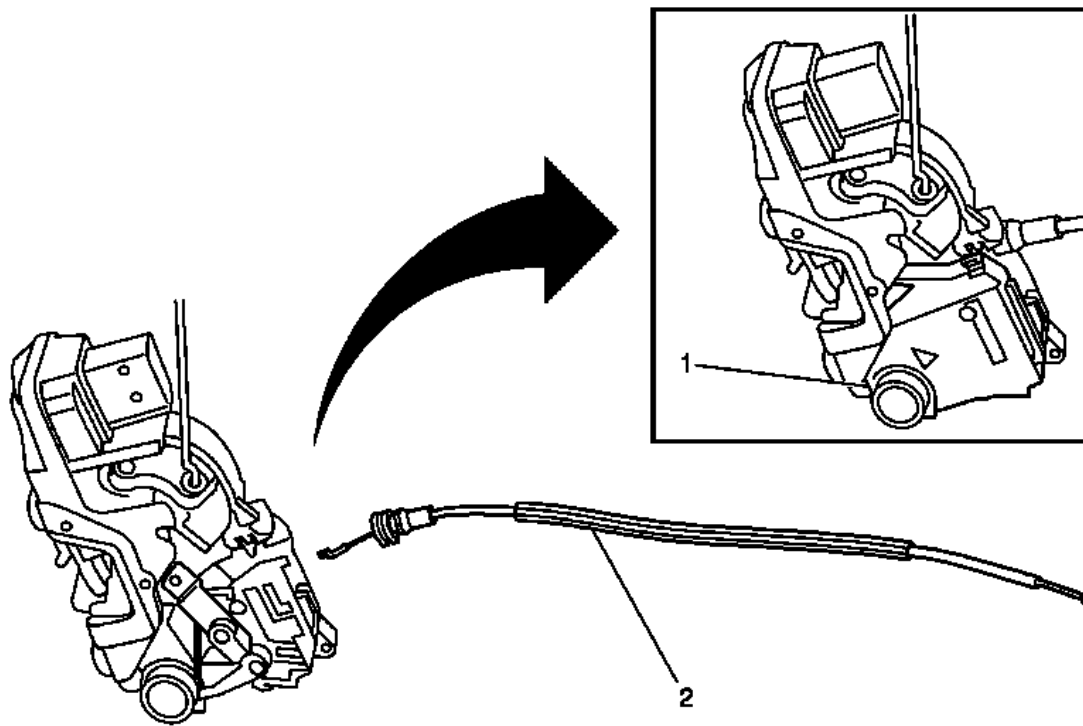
Rear Side Door Inside Handle Cable & Cover
